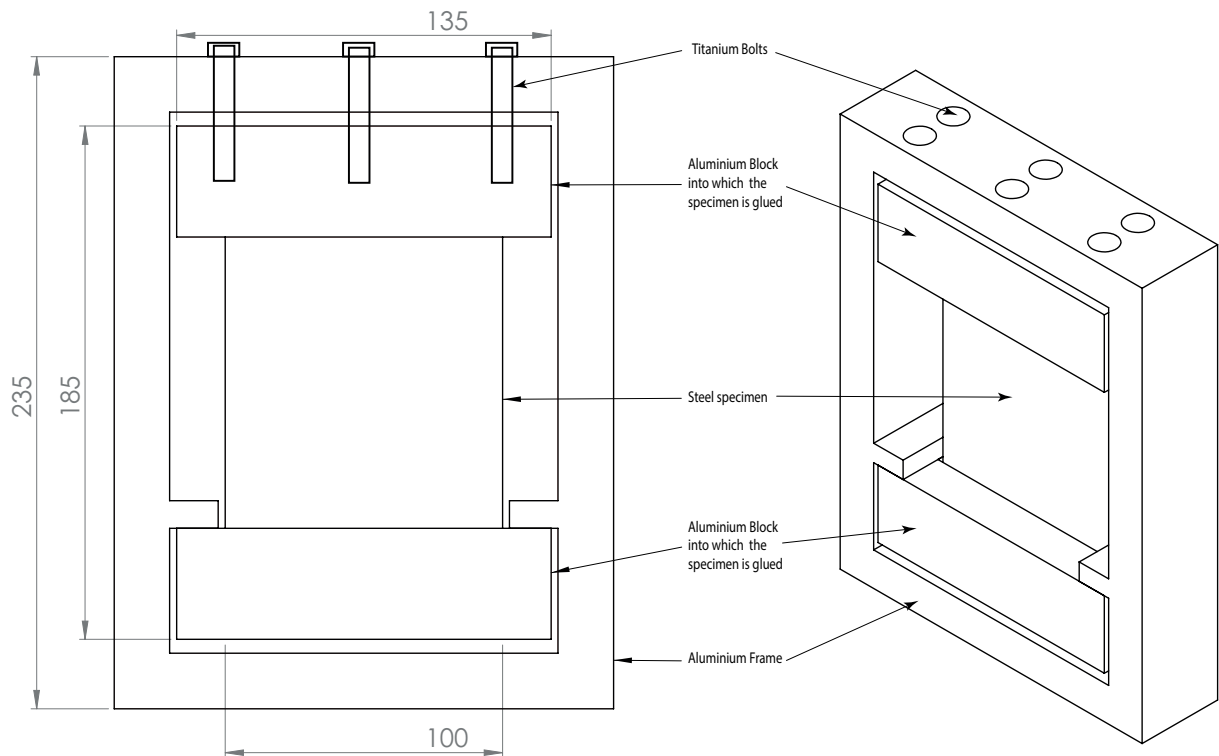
The Villari testing setup as used in this project. Top view with measurements in mm (left) three-dimensional view (right).
